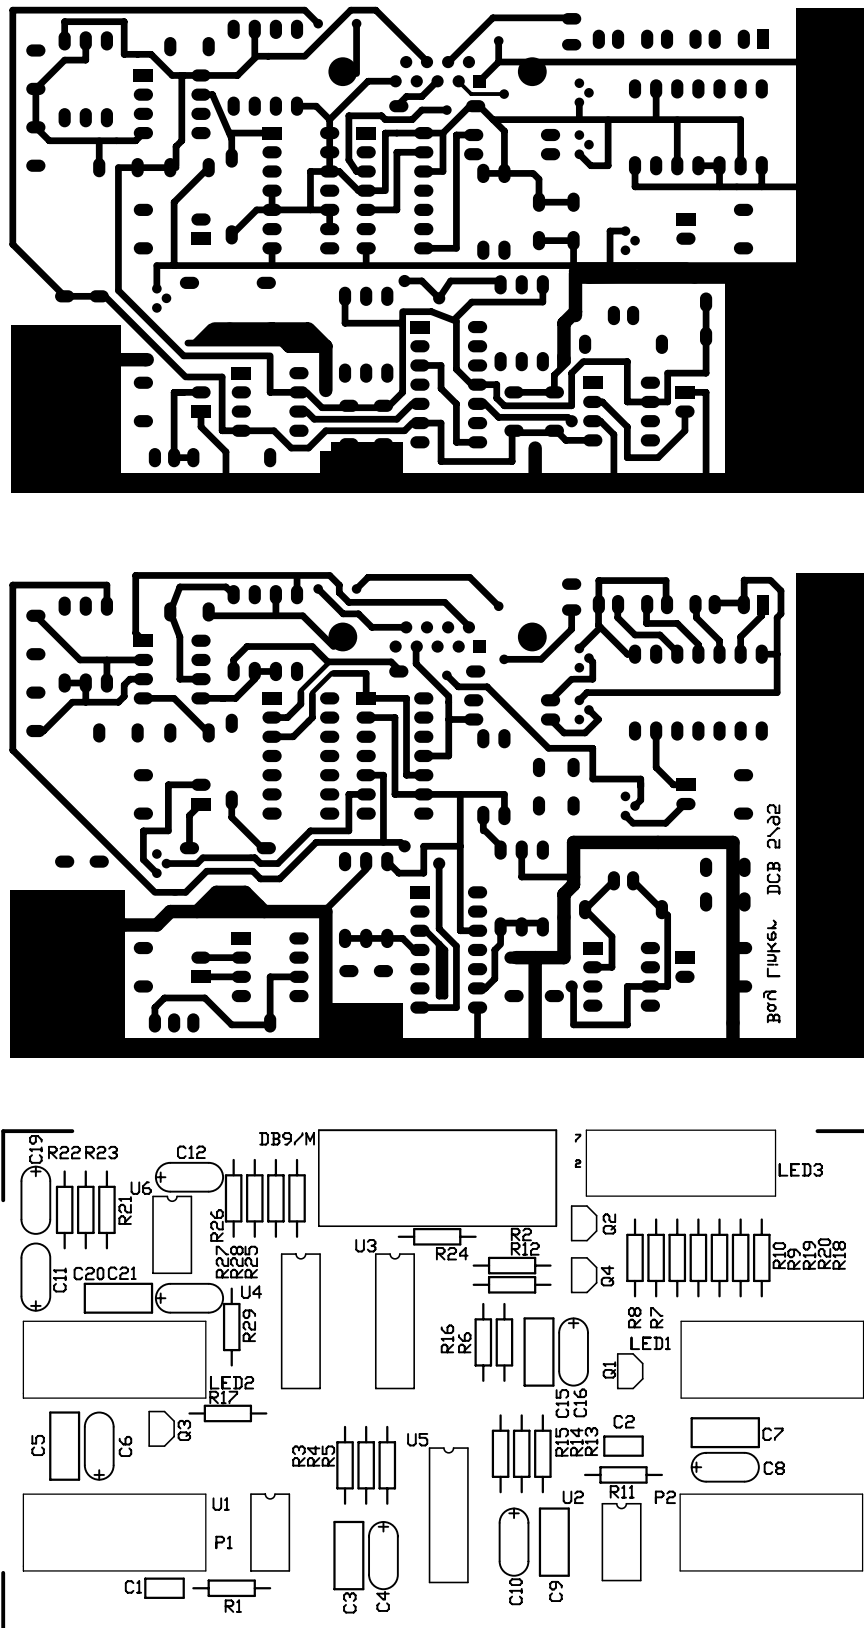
Printed circuit board layout of the bay linkers (true size). From top to bottom: top layer, bottom layer, component overlay.
